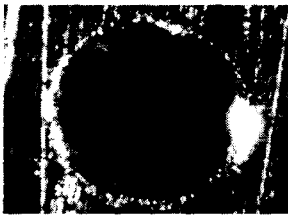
Micro drilled hole(feed 60, step10, rpm 30000)
